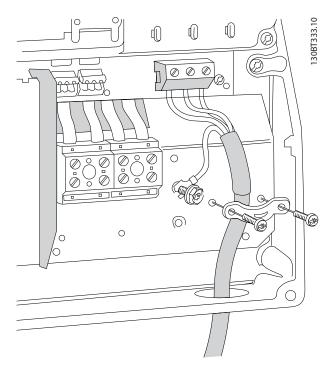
Motor Connection for Enclosure Type B1 and B2 (IP21/NEMA Type 1, IP55/NEMA Type 12 and IP66/NEMA Type 4X)
